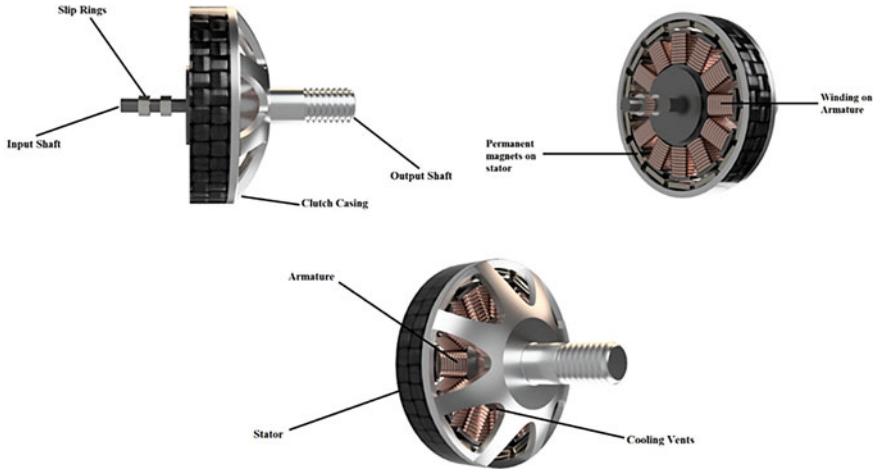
Side view, front view, and isometric view of regenerative clutch system
